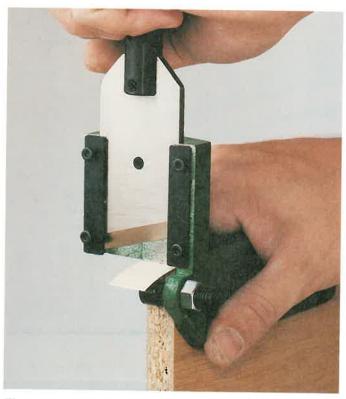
End trim tool, or cutoff knife for end flush cuts of edge banding. (*Tapes & Tools*)
